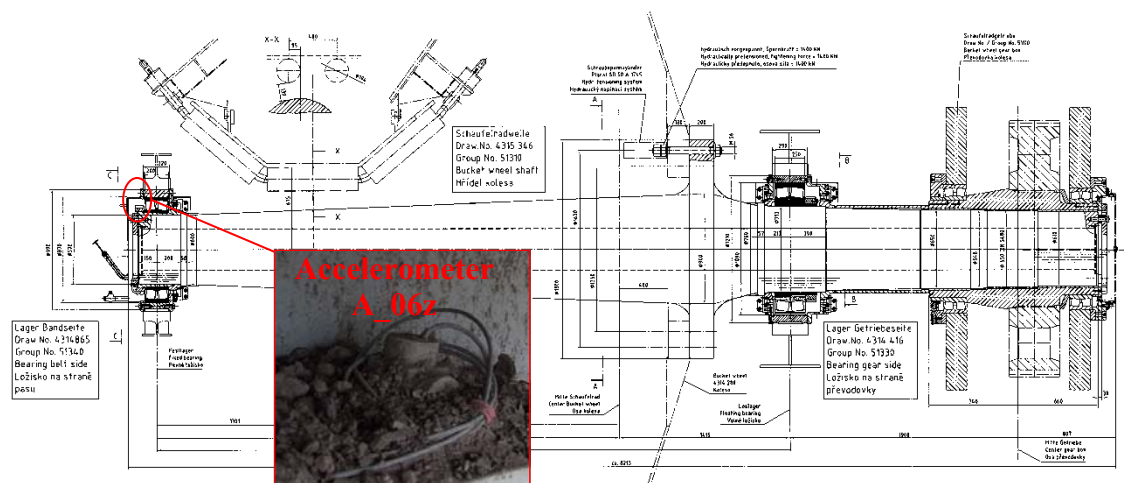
Scheme of bucket wheel shaft with accelerometer A\_06z.
